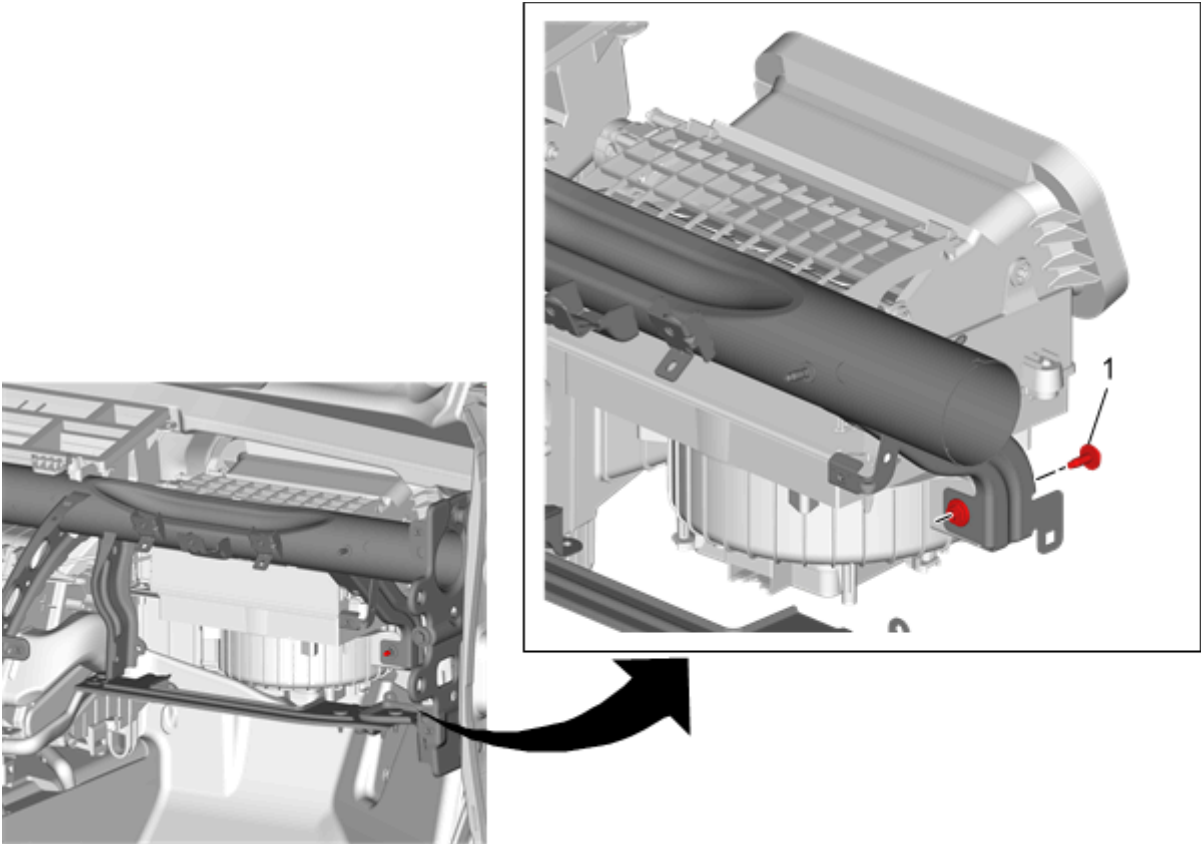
Heater and Air Conditioning Evaporator and Blower Module Bolt
